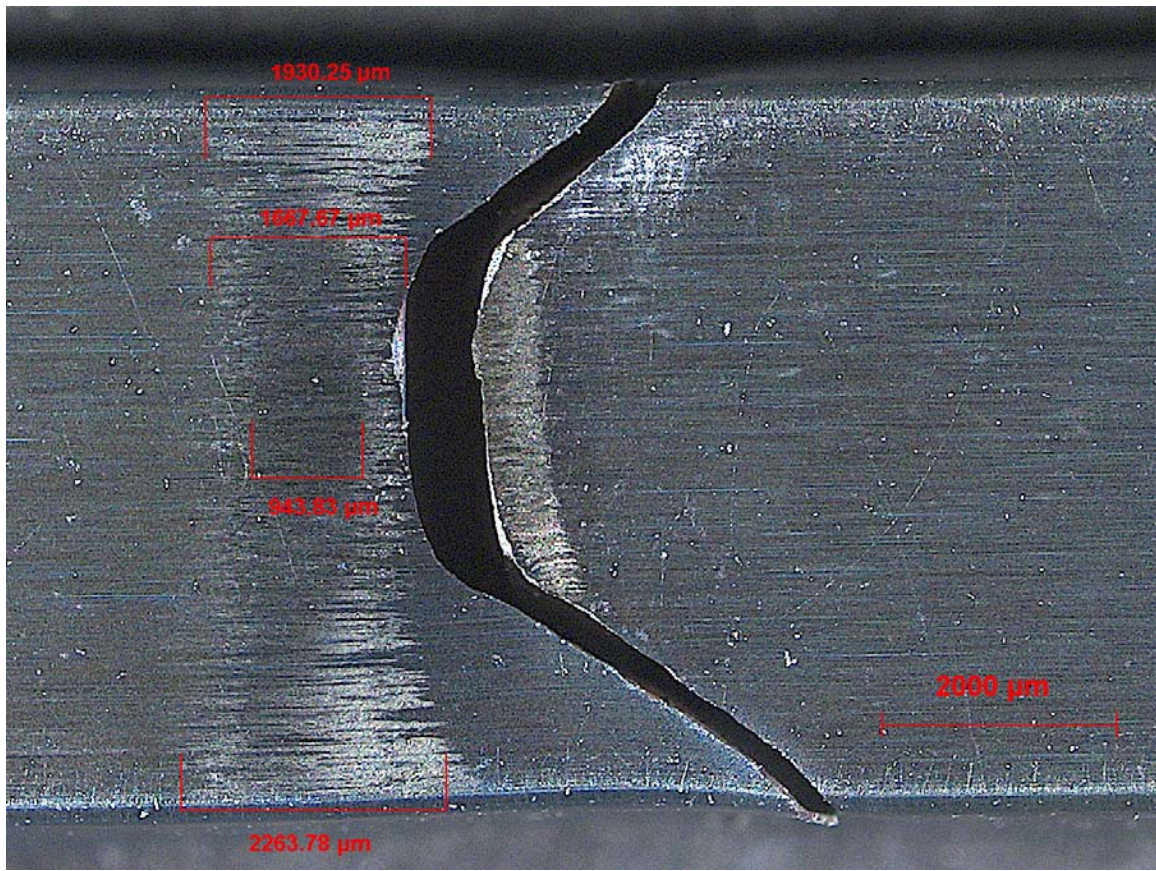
Fretting scar on specimen used in test #5 (right side pictured)
